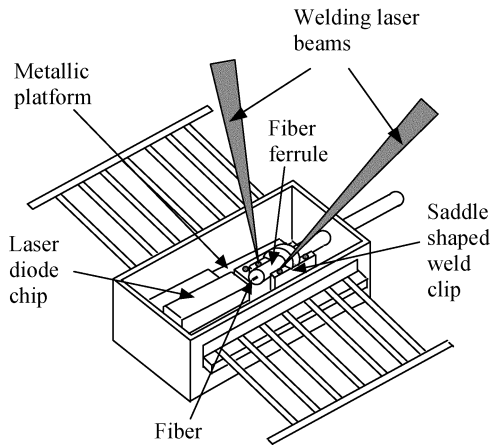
Typical structure of butterfly laser diode module package with incident welding laser beams applied.
